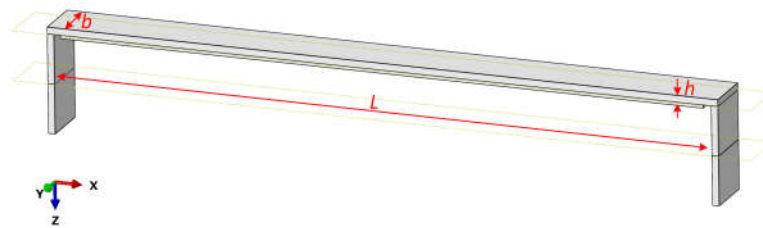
Schematic of clamped staple shape aluminium beam
